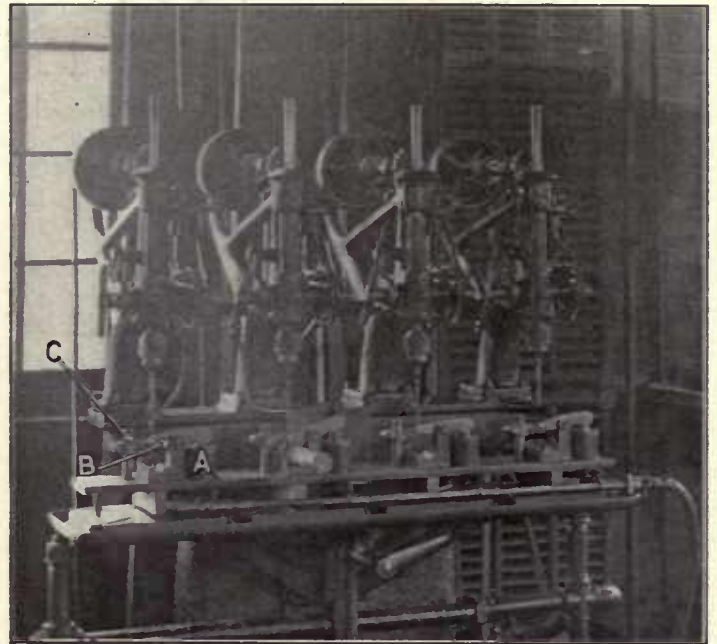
Pneumatic Clamps and Jigs for Boring Holes in Pins.
